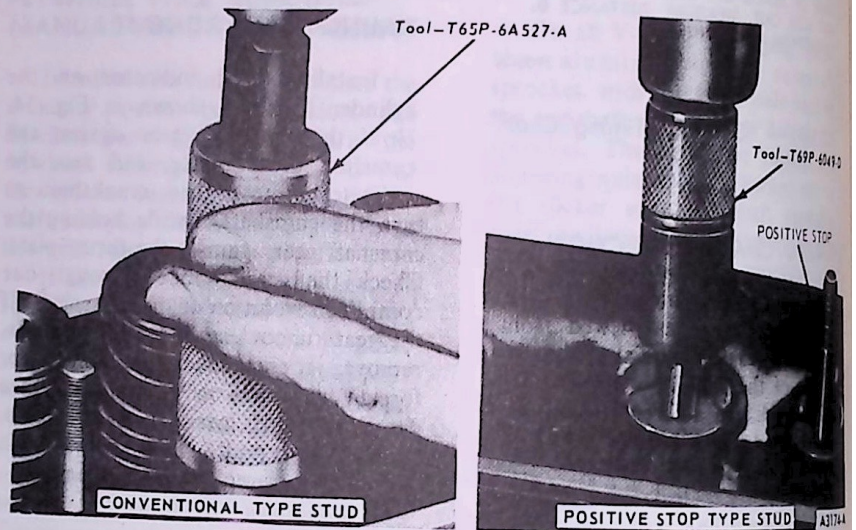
Installing Rocker Arm Stud—240 Six and 302-W V-8
